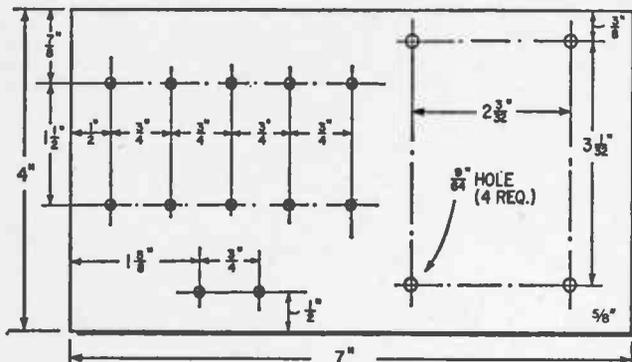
Front-panel layout is for a 4- by 7-inch sloping-front cabinet. The four $\frac{9}{64}$ -inch holes on the right must be marked and drilled accurately to mate with tapped spacers. Tubular-type spacers allow more sideplay but assembly becomes a bit more difficult.
